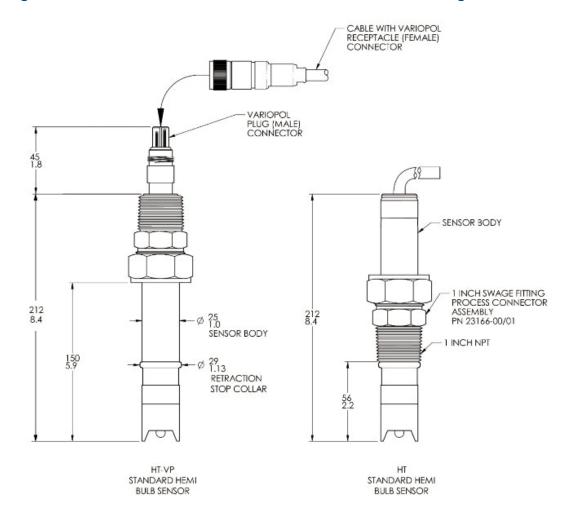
Rosemount 3300HT and 3300HTVP sensor dimensional drawing
